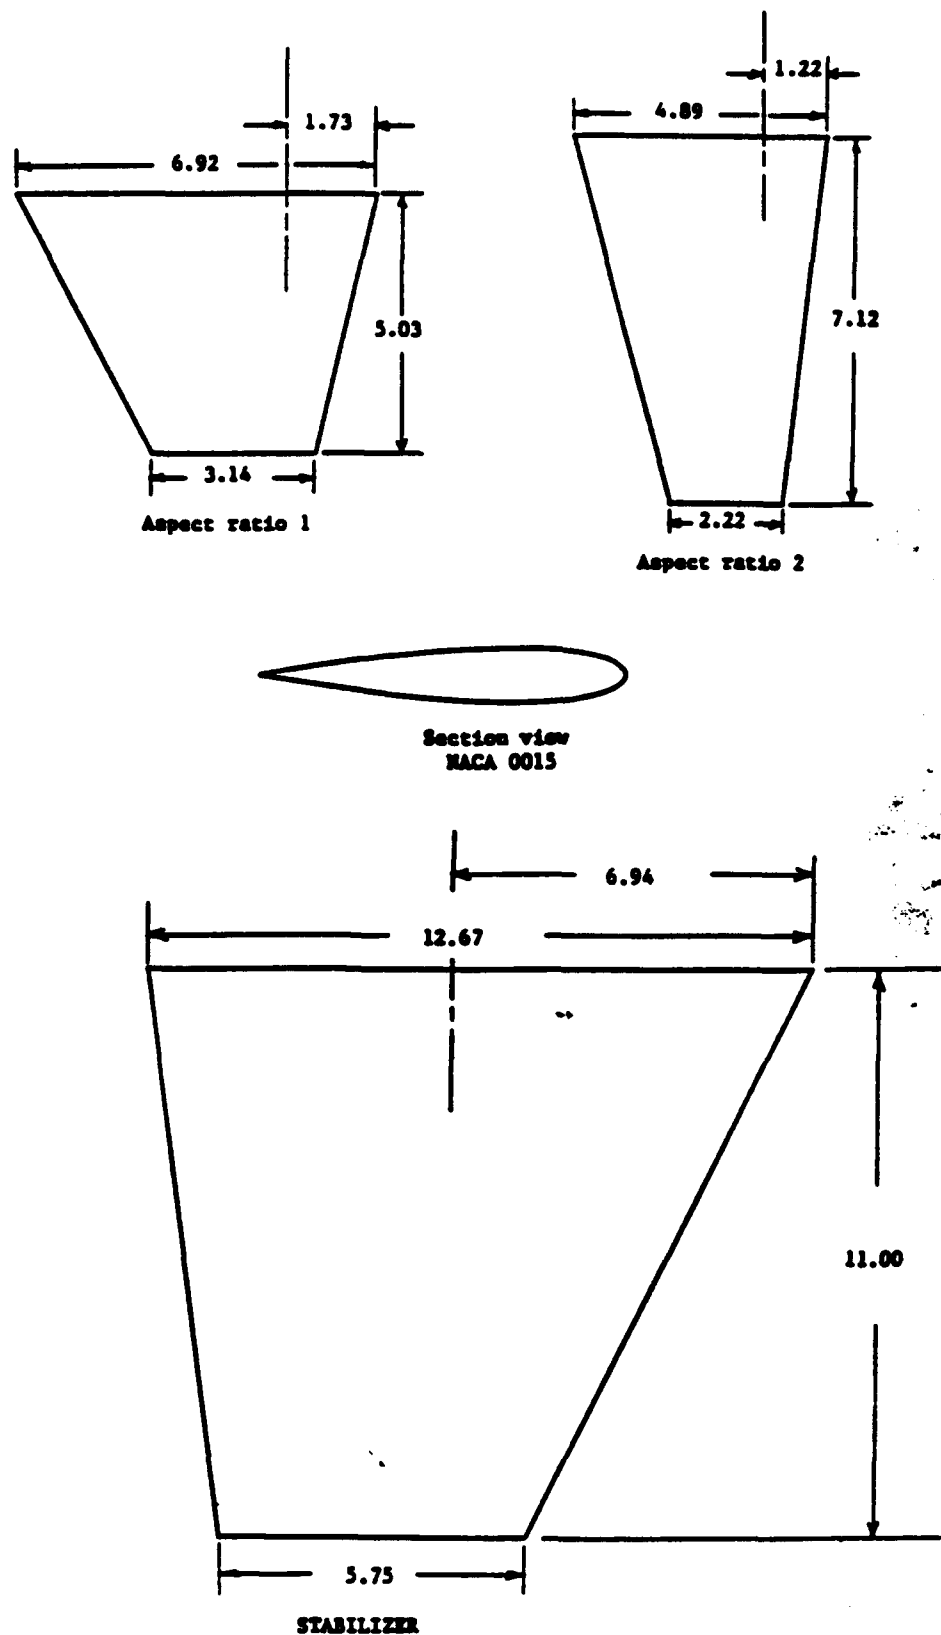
PLAN AND SECTION VIEW OF MODEL FINS.
